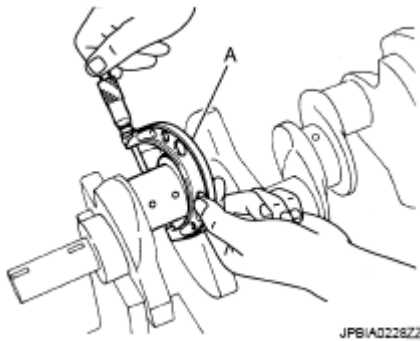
Measuring Outer Diameter Of Crankshaft Pin Journal
